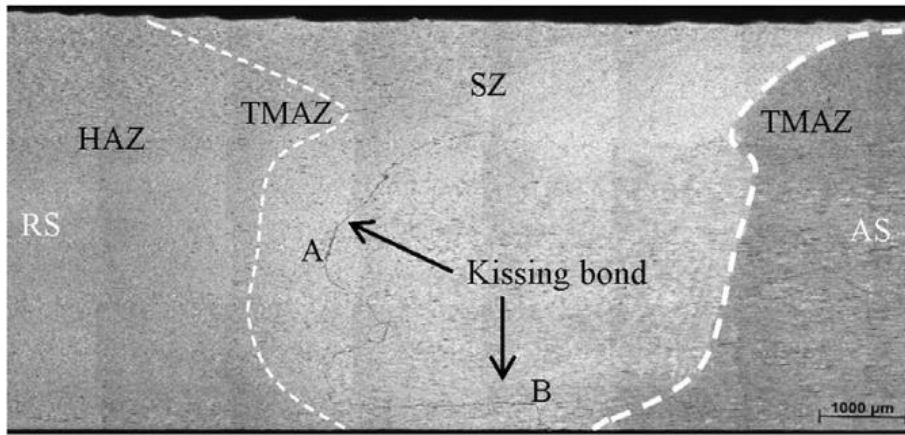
Macrograph of a weld with a kissing bond highlighted [32].
